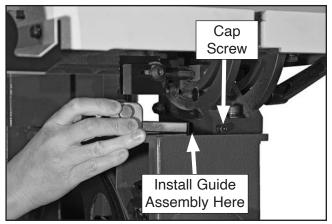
Installing lower "Euro-style" roller-disc guide assembly.
